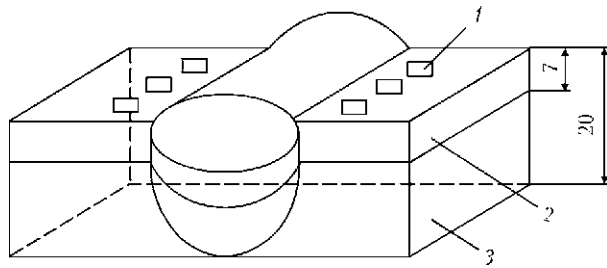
Section of welded specimen of two-layer steel for investigations: 1 – strain gauge; 2 – cladding layer; 3 – base metal
